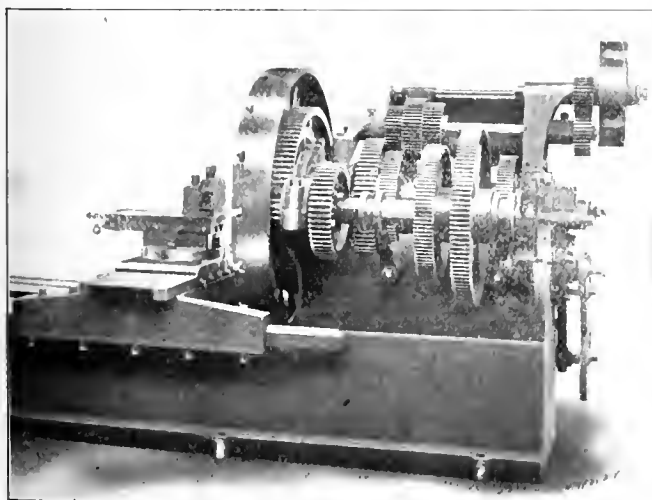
Geared Head of Lathe in Fig. 6, seen from the back of the Machine.
